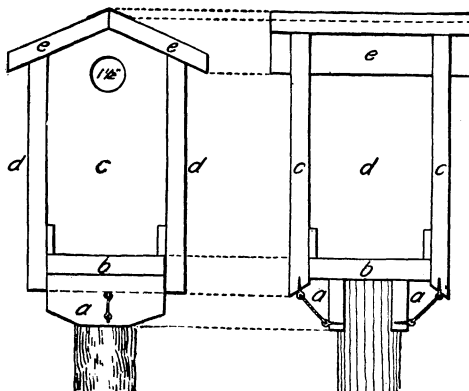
Diagrammatic drawings of bluebird house. This house can be removed from its floor by unfastening two wire hooks.
